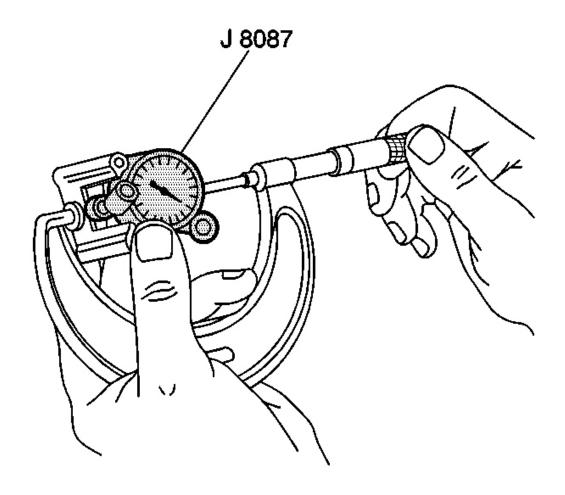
Measuring Bore Gauge With Micrometer Courtesy of GENERAL MOTORS CORP.
